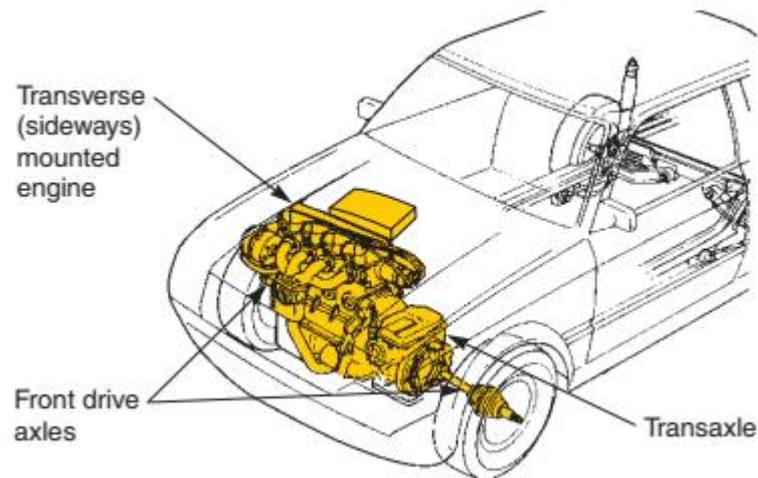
Front-wheel-drive vehicles do not have a drive shaft or a rear drive axle assembly. The complete drive train is in the front of the vehicle. (Ford)
